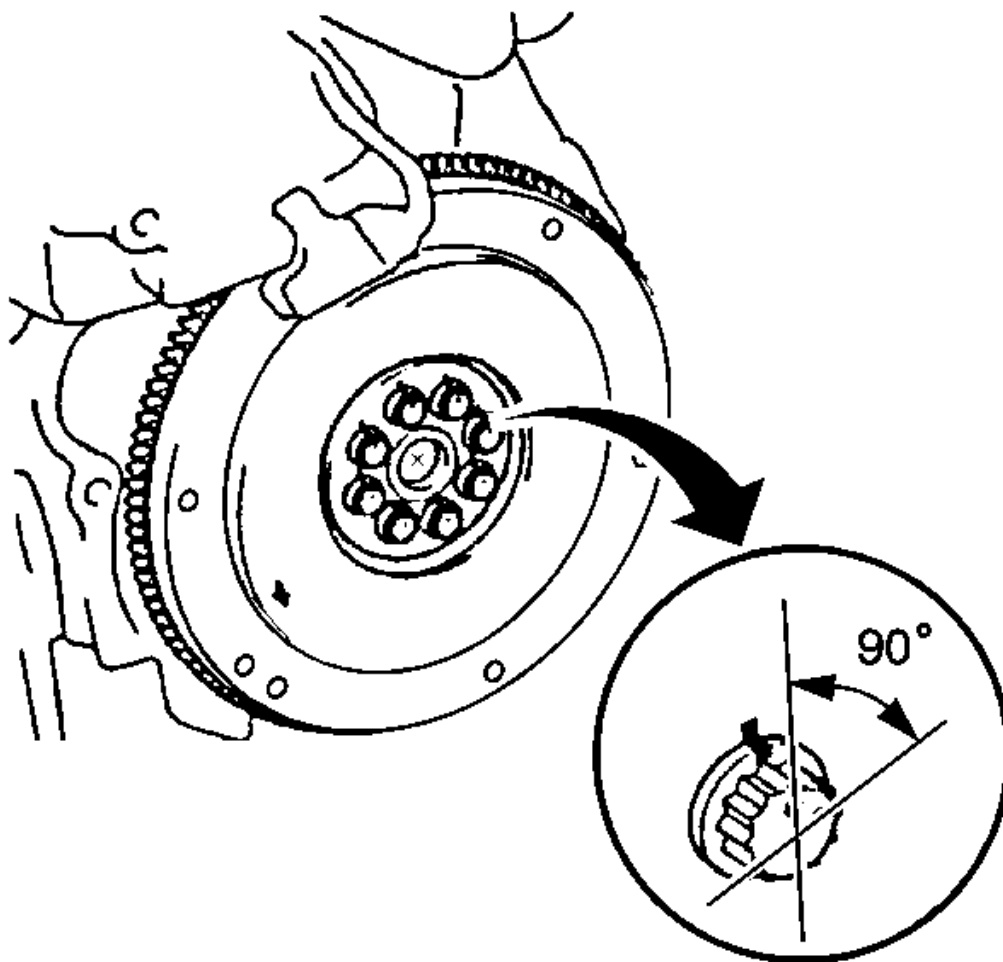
Tightening Flywheel Bolts Additional 90 Degrees
